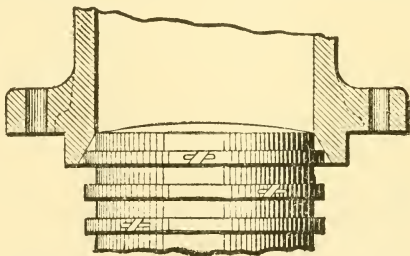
Sectional view of cylinder showing bevel at the end of the bore which is provided to facilitate the insertion of the piston.
